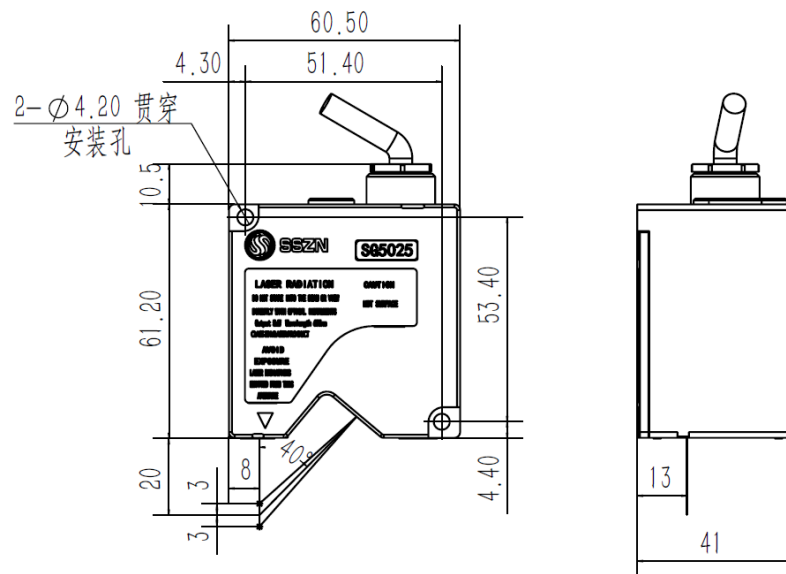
SG5020/5 Sensor Head dimensional diagram Unit (mm)
